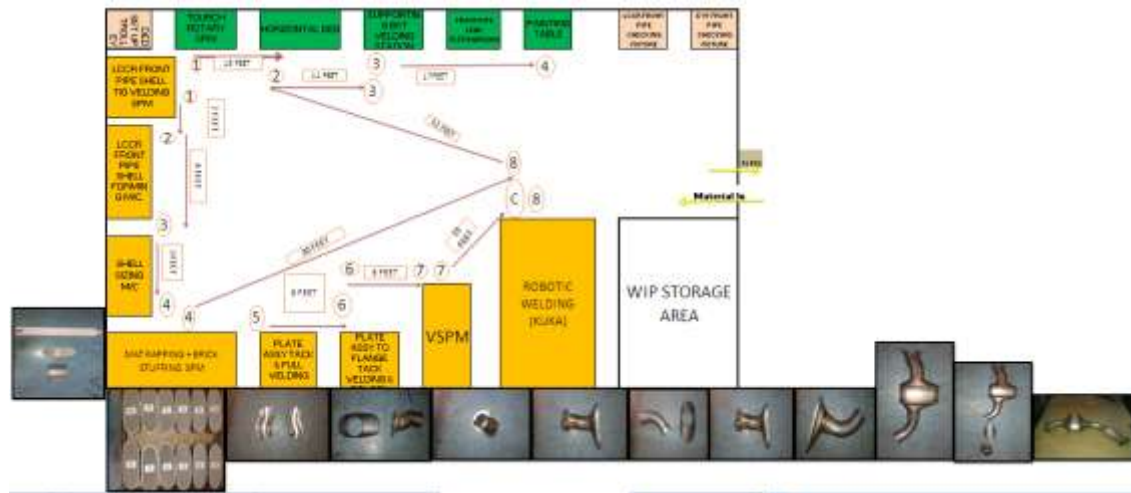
Scorpio W105 LCCR Front Pipe Assembly Layout
